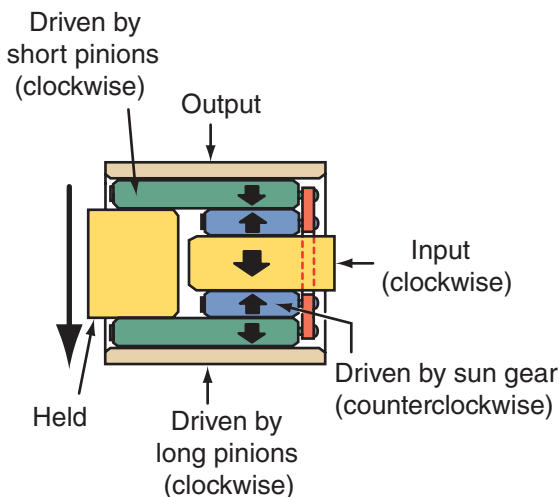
Power flow through a Ravigneaux gearset while operating in second gear.
